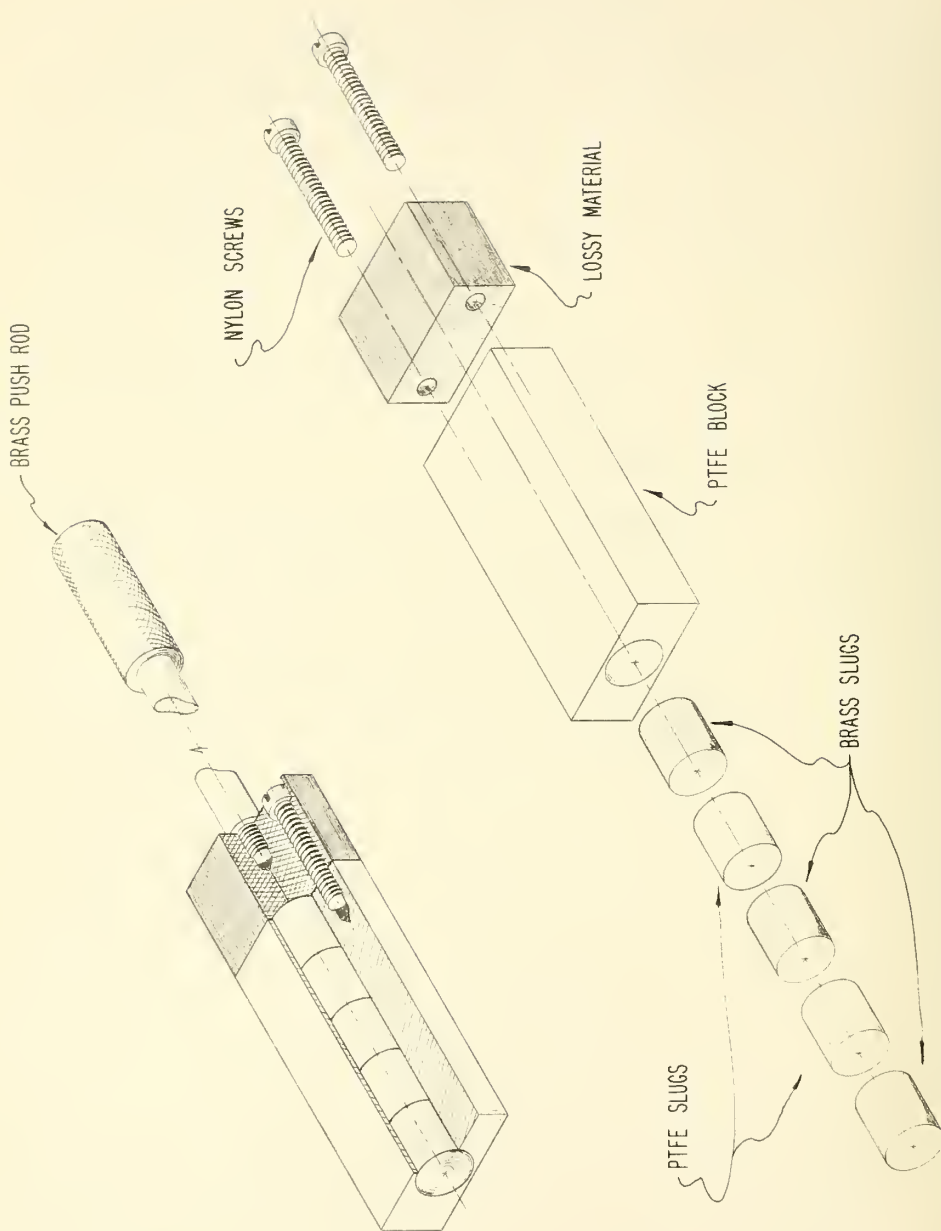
Assembled and exploded views of a sliding short with a three-section cylindrical brass slug encased in PTFE.
